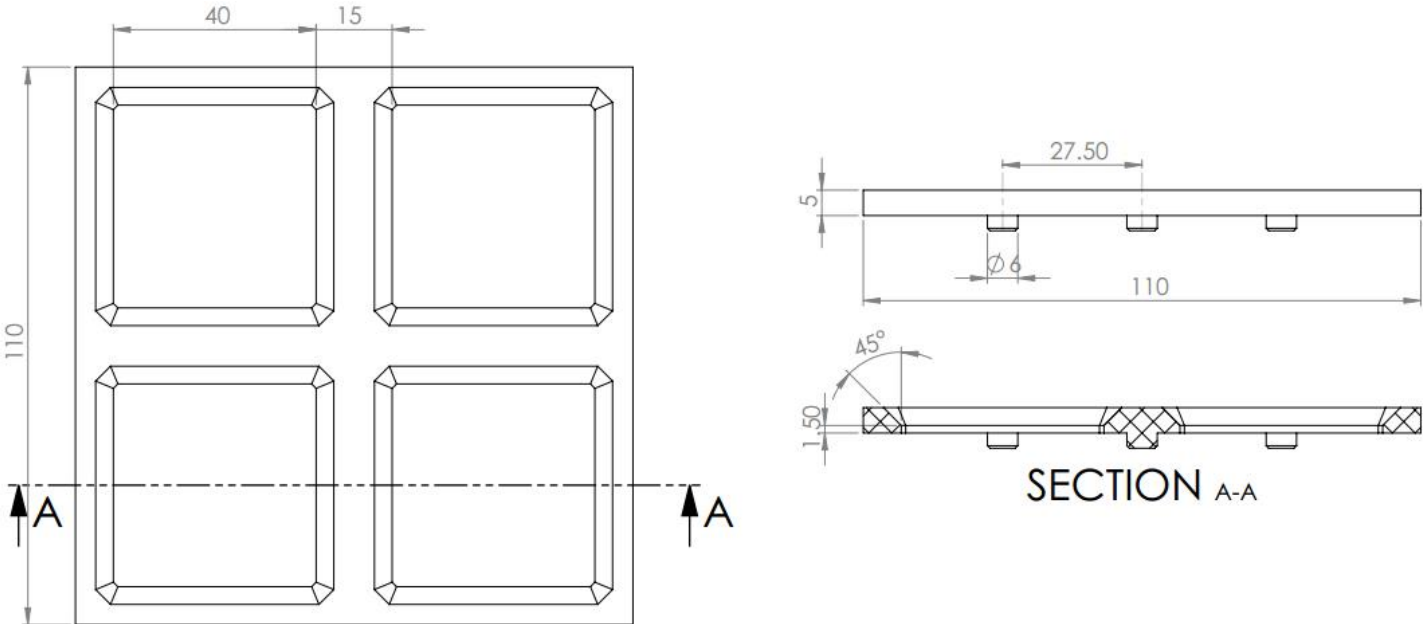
Container pad dimensions, as designed – manufactured to ± 0.5 mm tolerance
